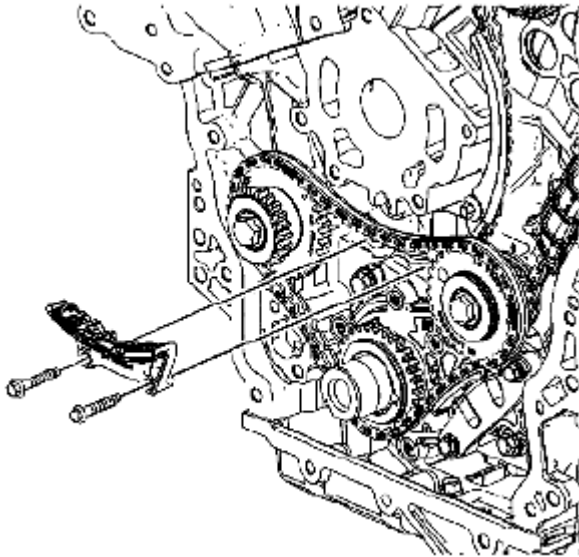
Identifying Primary Camshaft Drive Chain Upper Guide And Bolts
